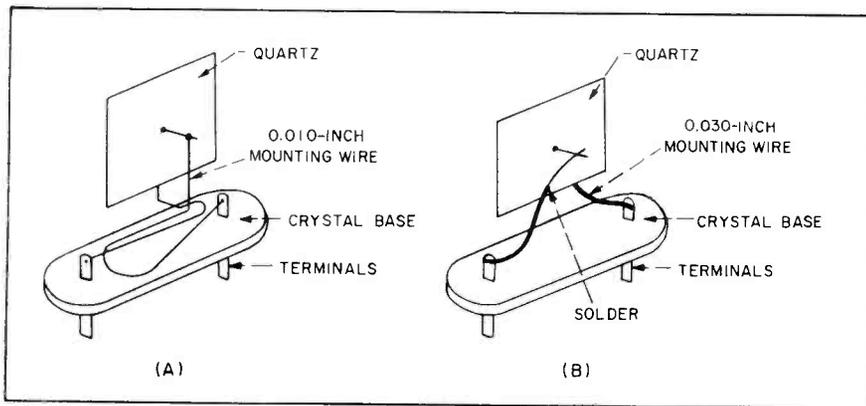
Conventional crystal mounting (A) has lower tolerance to vibration than more rigid mount (B) designed for vibration up to 500 cps
